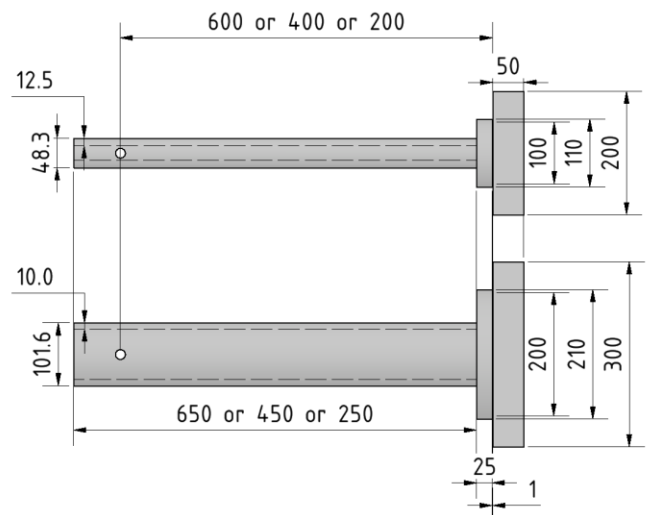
Test specimen for bending tests, above: small geometry, below: large geometry; all dimensions in [mm] [10]
